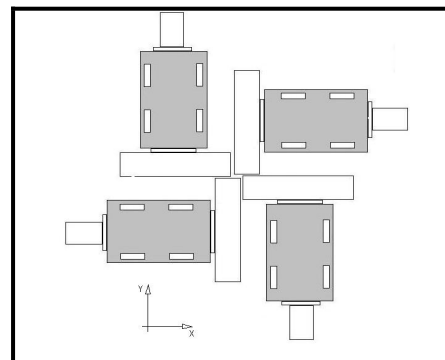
Schematic diagram of the four groups roller-bearing/shaft/cylinder used for cold-drawing of square wire
